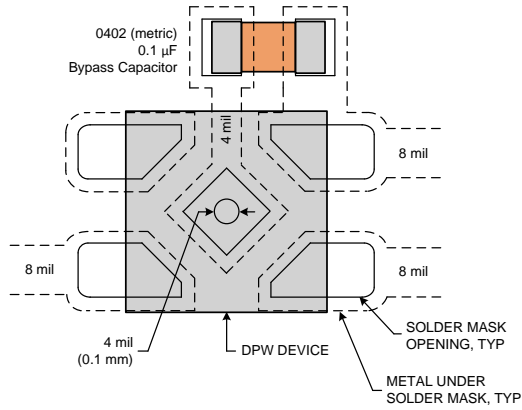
X2SON-5 (DPW) Package PCB Complete Footprint Example with Bypass Capacitor Shown
